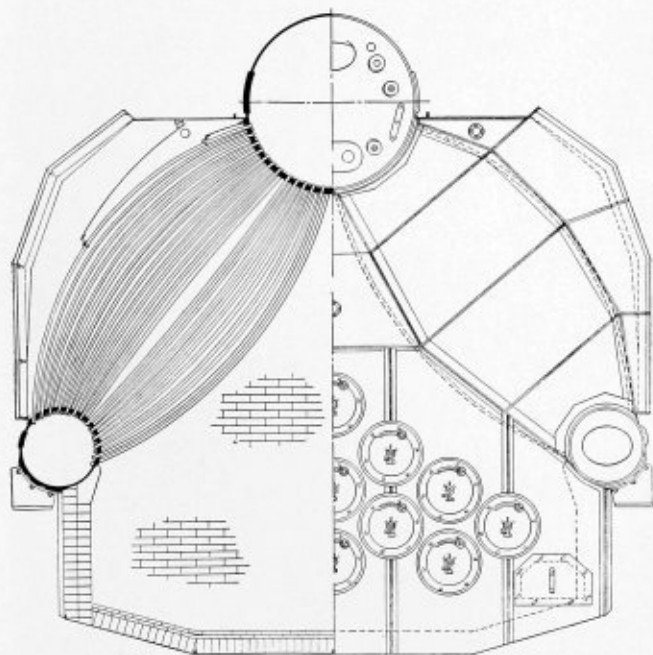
Babcock & Wilcox express boiler (A type), Unit D, Table 1
